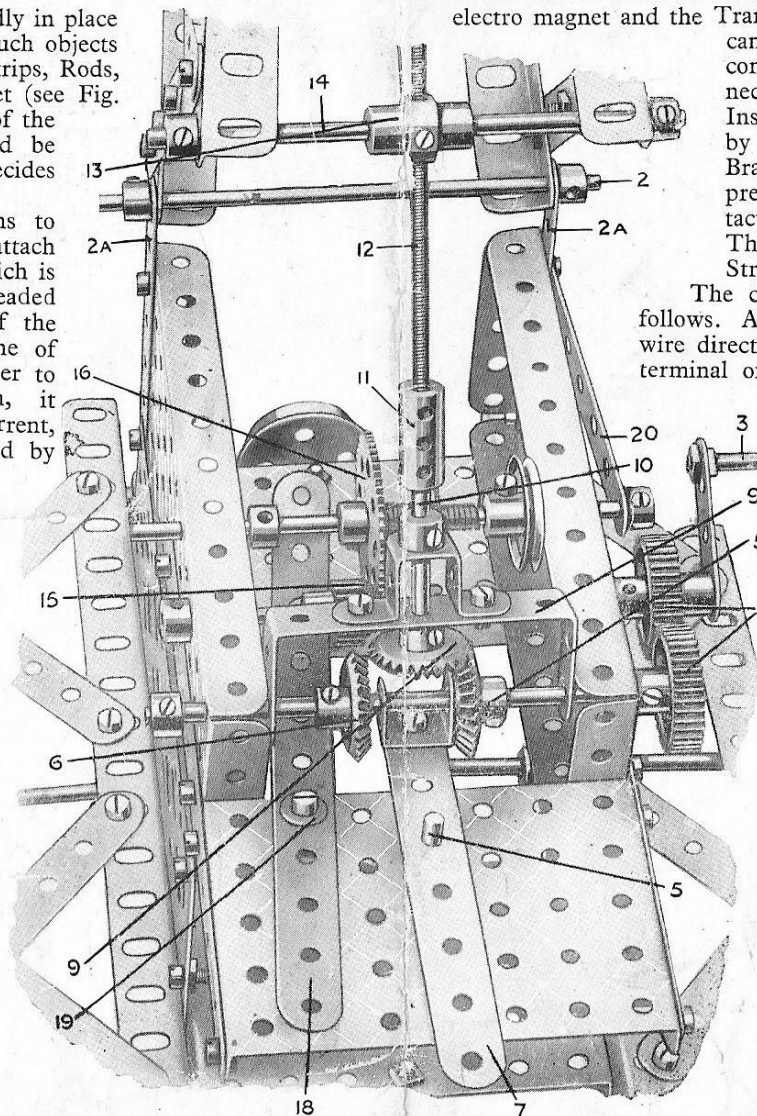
Gear Box, viewed from the rear, showing luffing mechanism with reversing gear, etc.
